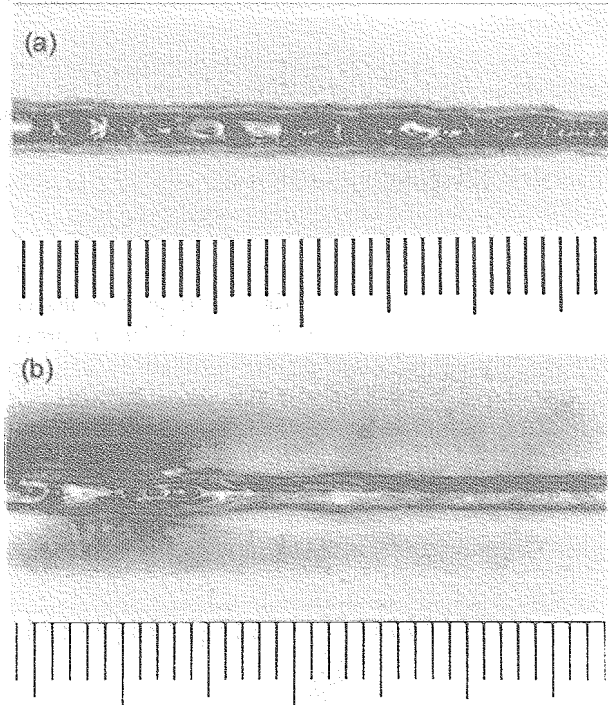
Macrographs of laser welds produced using (a) Argon and (b) Helium as a shielding gas with 15 l/min flow rate
